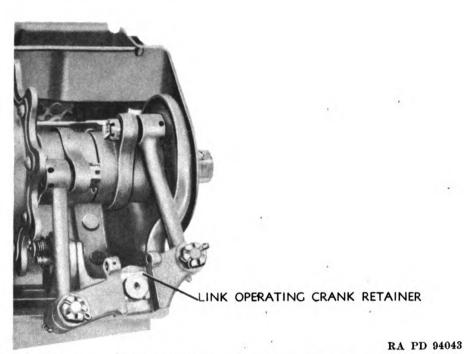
20-mm right-hand feed mechanism AN-M2—Removal of link operating crank retainer.
